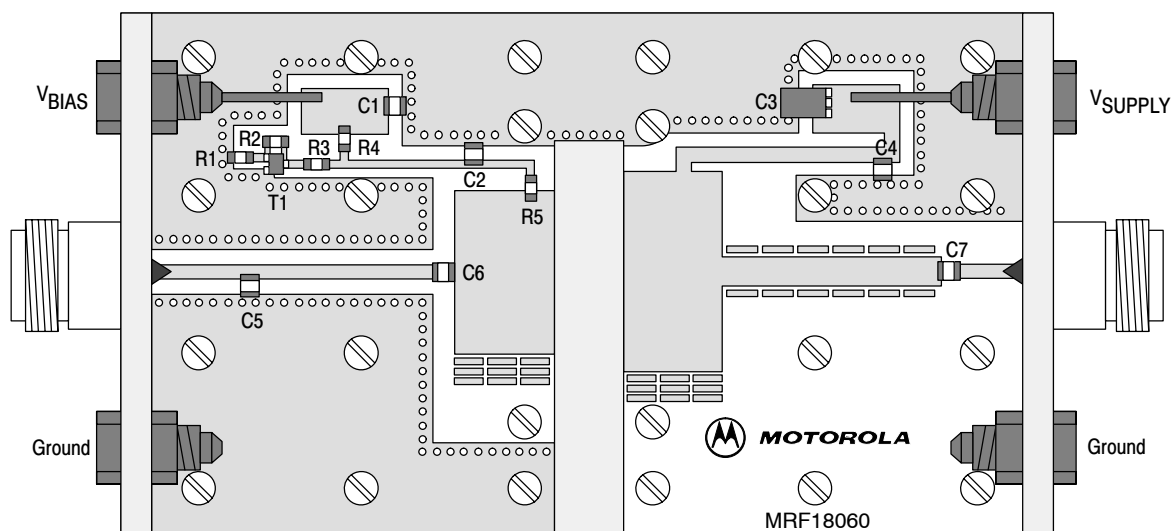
1805 - 1880 MHz Test Fixture Component Layout
